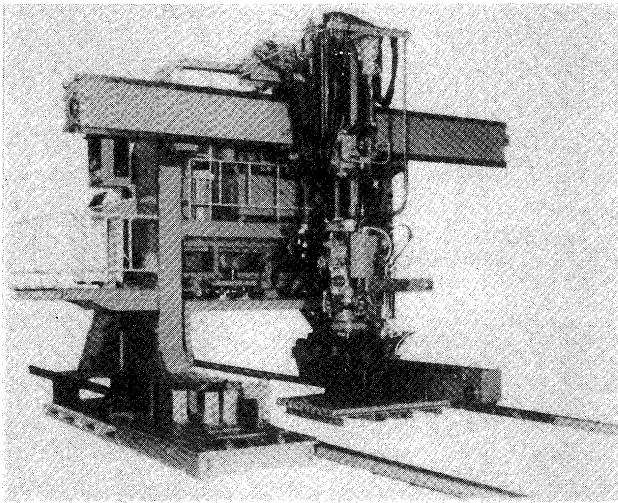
Robot for automation of welding line of steel plate factories.
